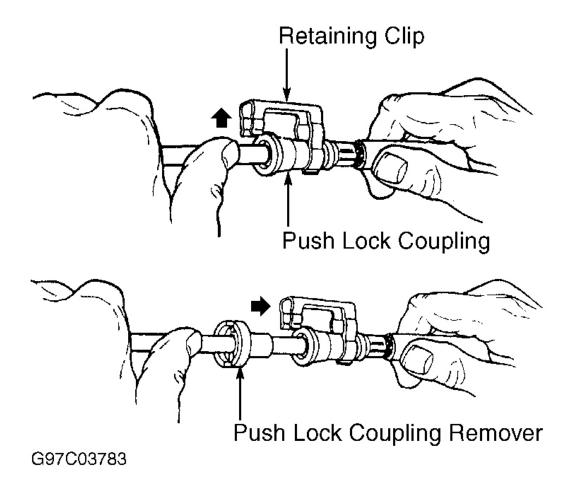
Identifying, Removing & Installing Push Lock Coupling Courtesy of FORD MOTOR CO.
